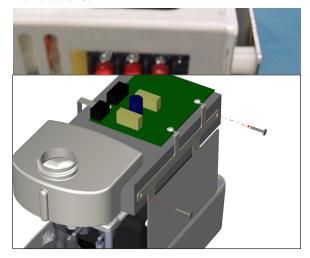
Step 6 Remove Phillips screws from rear braket.
